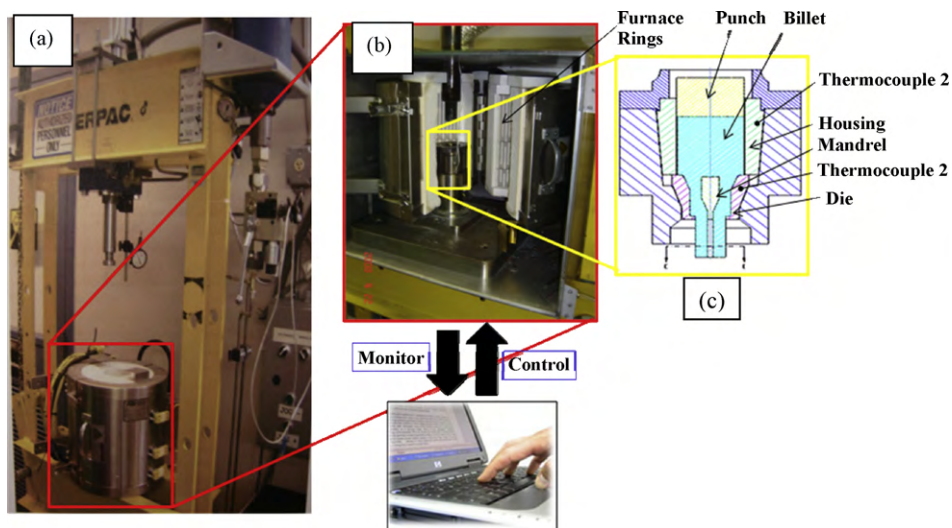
(a) The laboratory vertical glass extrusion press and (b) extrusion press furnace and the tooling assembly (c) schematic of the die assembly.
